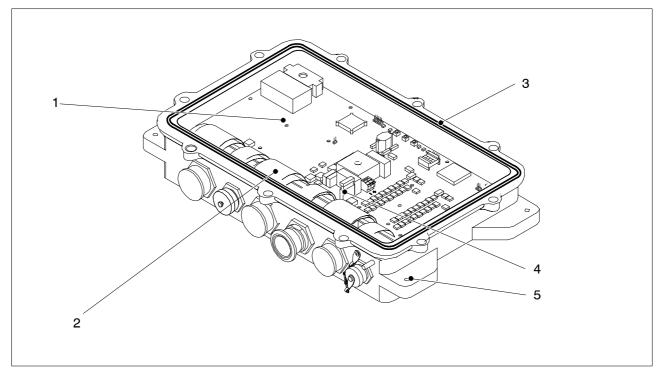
Internal structure of Engine Control Unit ECU (cover removed)
